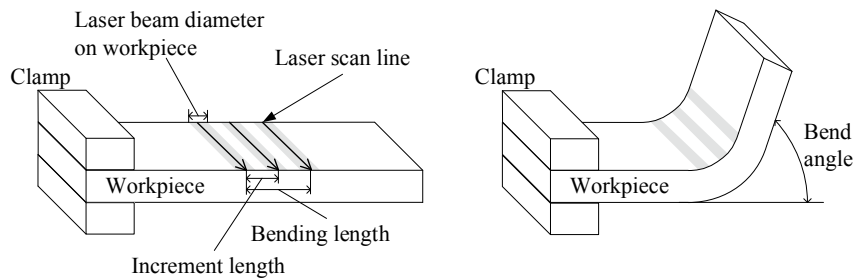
Left: The workpiece with the planned laser scan lines, in this case three. Right: The workpiece after processing with a bend profile.
